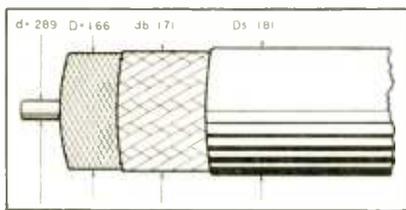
Typical cable dimensions for No. 1 AWG inner conductor and 50-mil jacket.
